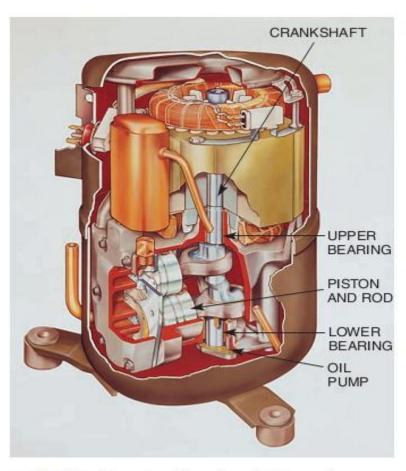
The internal workings of a welded hermetic compressor. Courtesy Tecumseh Products Company
